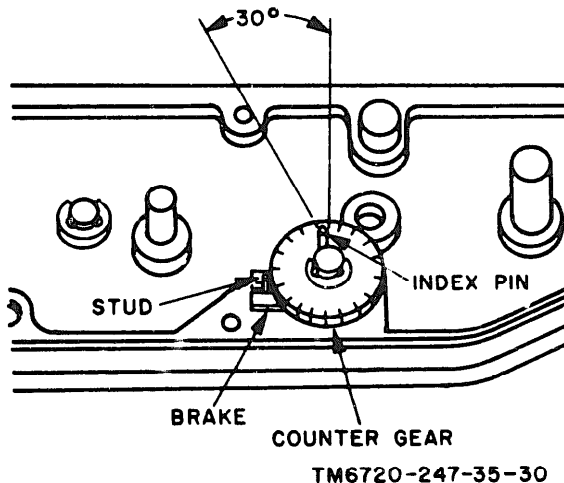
RH/50 Carriage, showing position of counter gear assembly.
